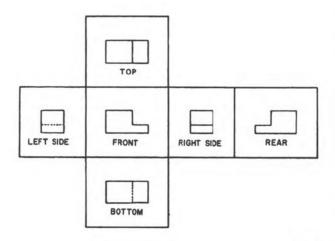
Standard arrangement of multiview sketches/drawings.
